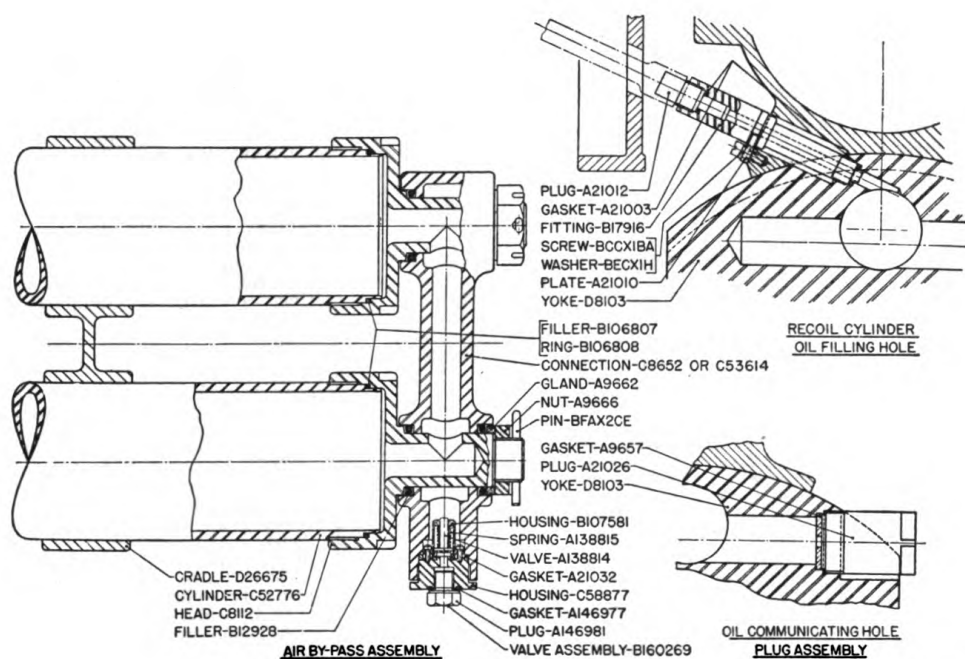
Recoil cylinder, assembly—sectioned views.
